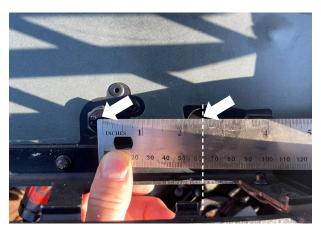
Front torque arm mounting bolt (left arrow), first mark for drill hole (right arrow)
